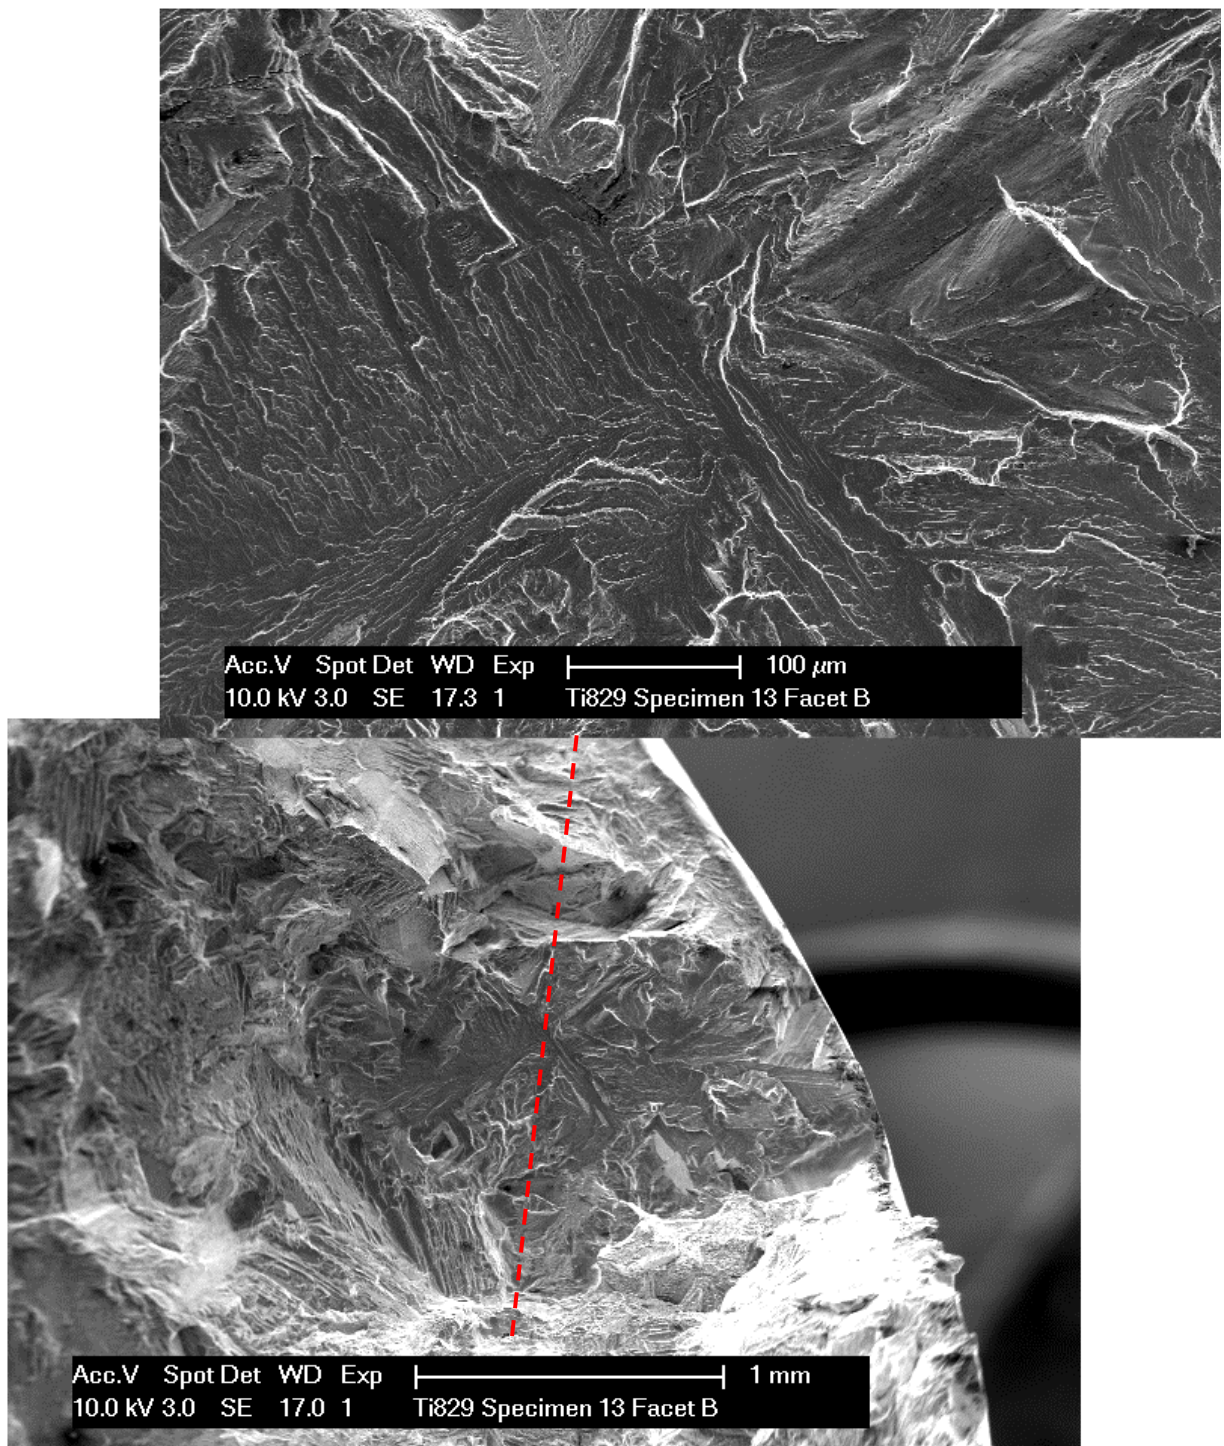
Ti829 dwell LCF test specimen fracture surface – Facet B
